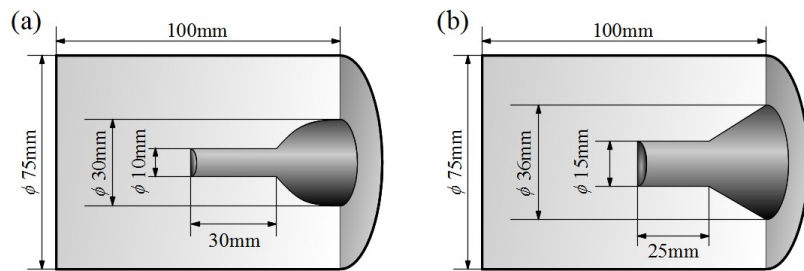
Cross sectional drawing of the molds for compact vacuum centrifugal caster. (a) mold with 30mm x  $\phi$  10mm and (b) 25mm x  $\phi$  15mm.
